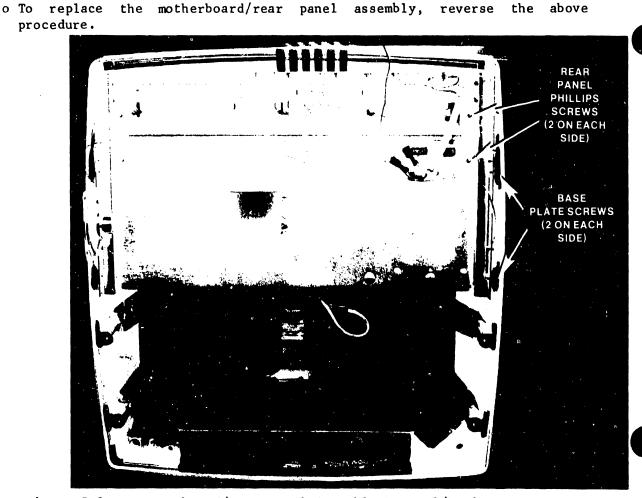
Motherboard/Rear Panel Assembly Removal/Replacement
